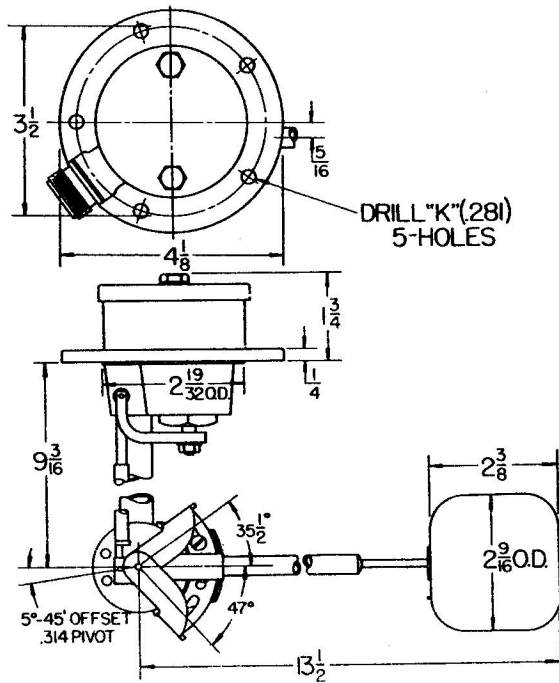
(Sheet 3 of 4 Sheets). General Dimensions
